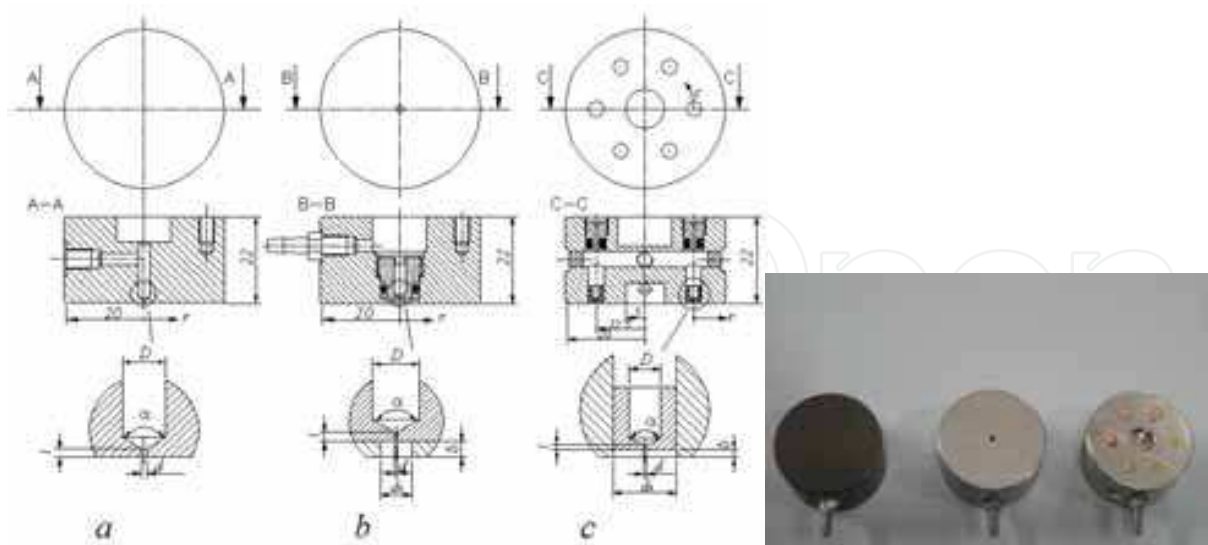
Schematic view and photo of pad types "a", "b", "c" under test
